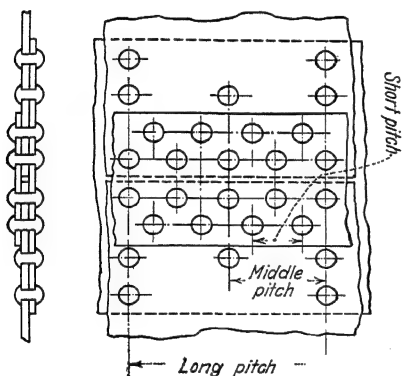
5.—Multiple-riveted butt joint with four rows of rivets.
